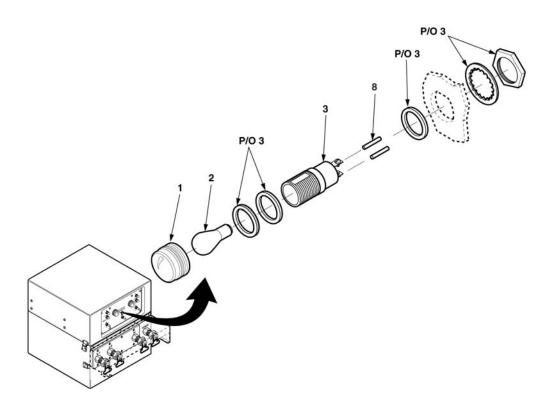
Lights/Lamps Assembly, 97403 13230E6739-Assy
